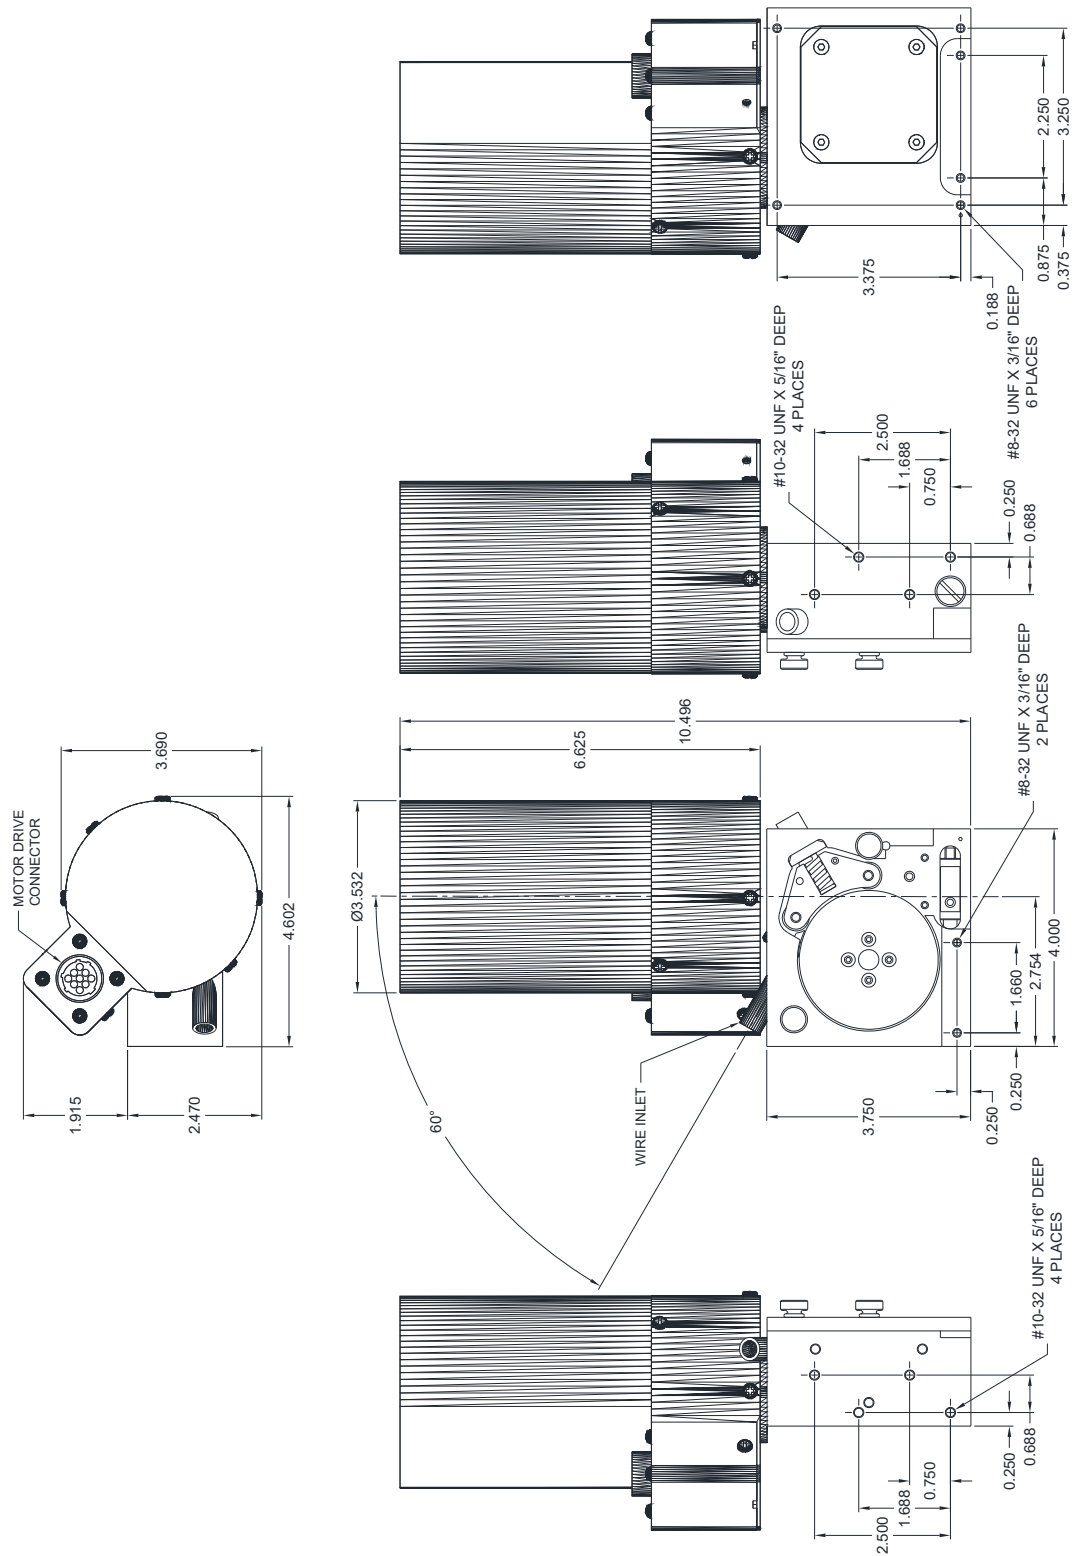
Low Speed Standard Hand Capstan Mounting Dimensions
